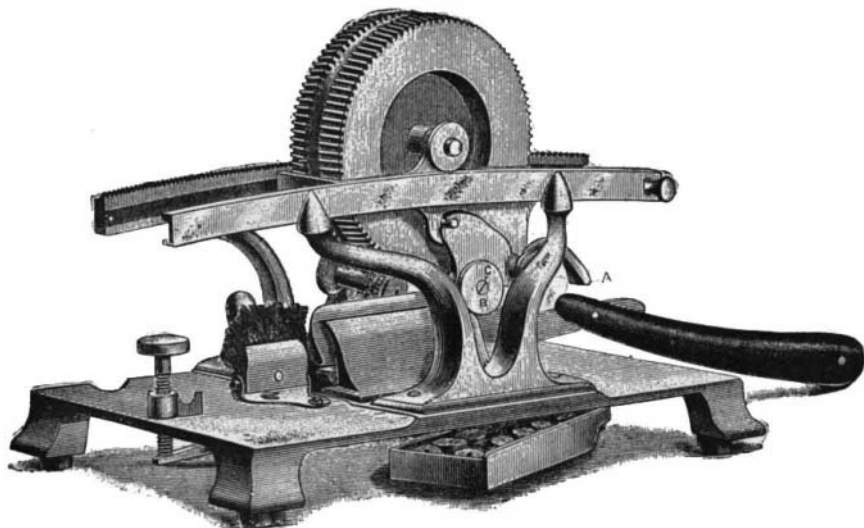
MACHINE FOR GRINDING RAZORS—SIDE VIEW.
